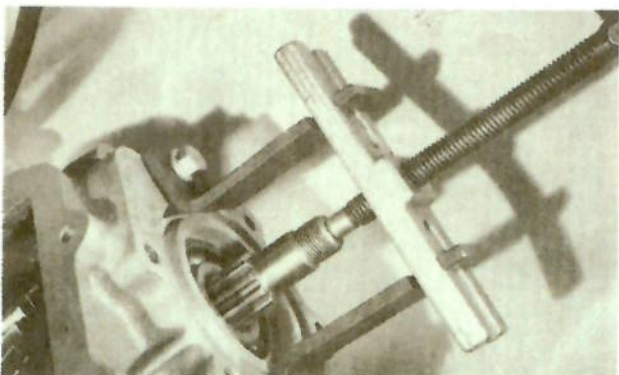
REMOVING THE TRANSFER CASE FROM THE TRANSMISSION CASE WITH UNIVERSAL PULLER.
